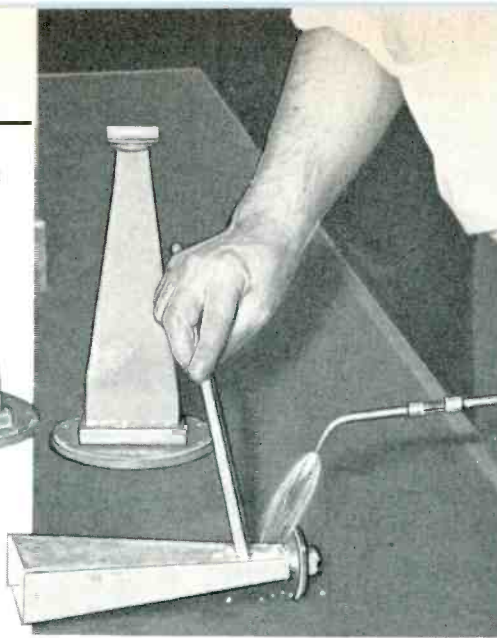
Joining metal pieces to form a tapered wave guide adapter.
